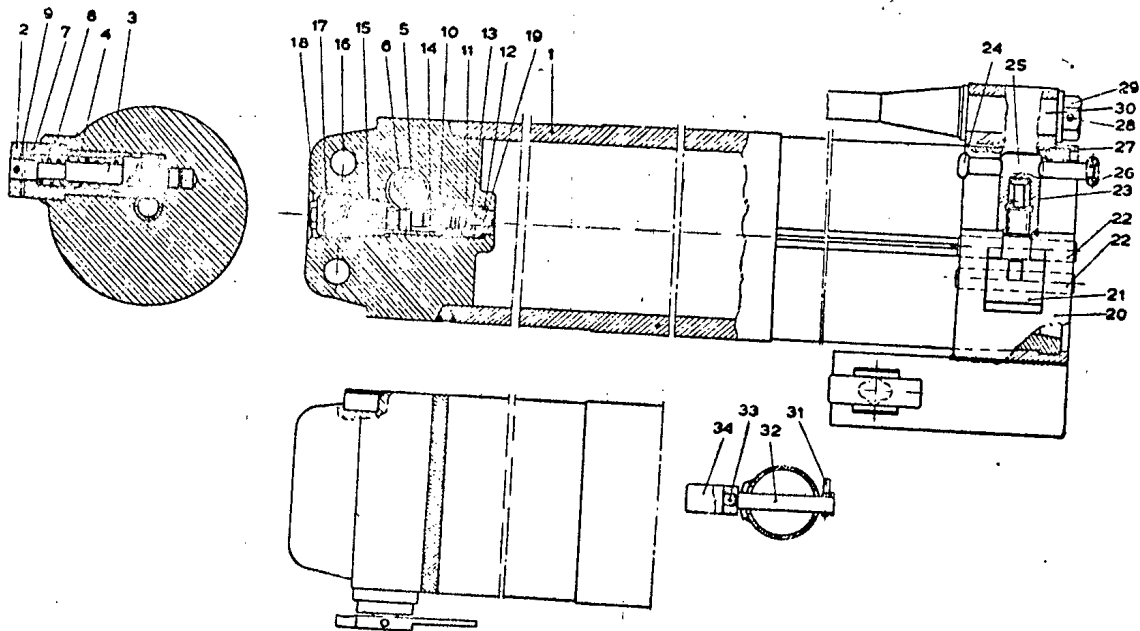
Barrel assembly, trigger and firing parts and lunette
